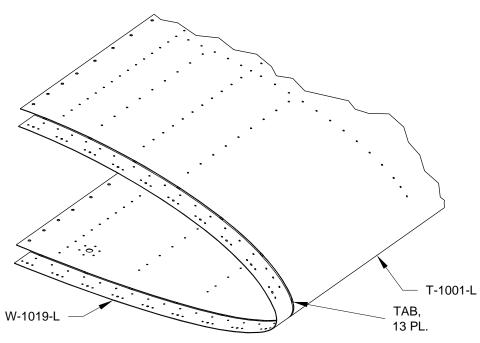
REMOVING SPLICE STRIP FROM FUEL TANK SKIN
